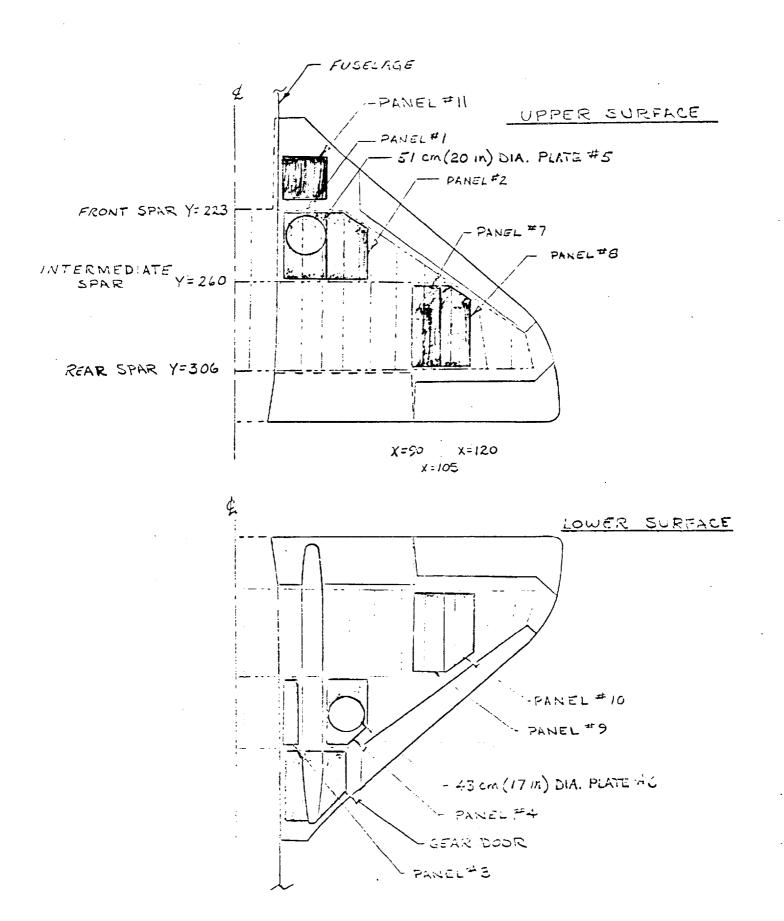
HOLE CONFIGURATION #14. ALL PLATES & PANELS REMOVED; GEAR DOOR LOCKED OPEN
